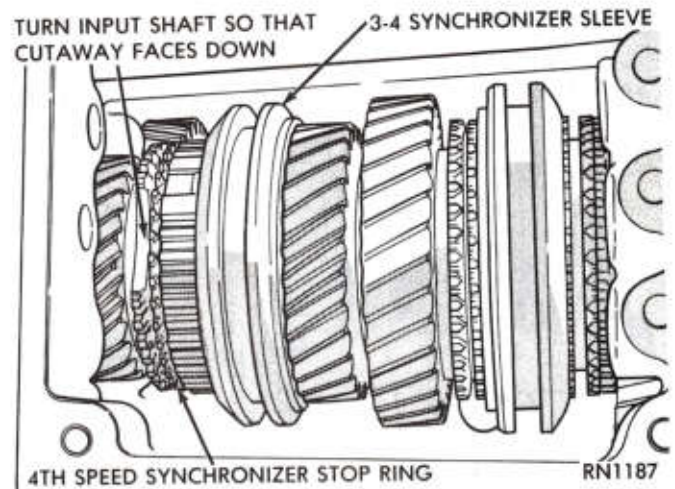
Drive Pinion Gear Cutaway Area Faces Countershaft
